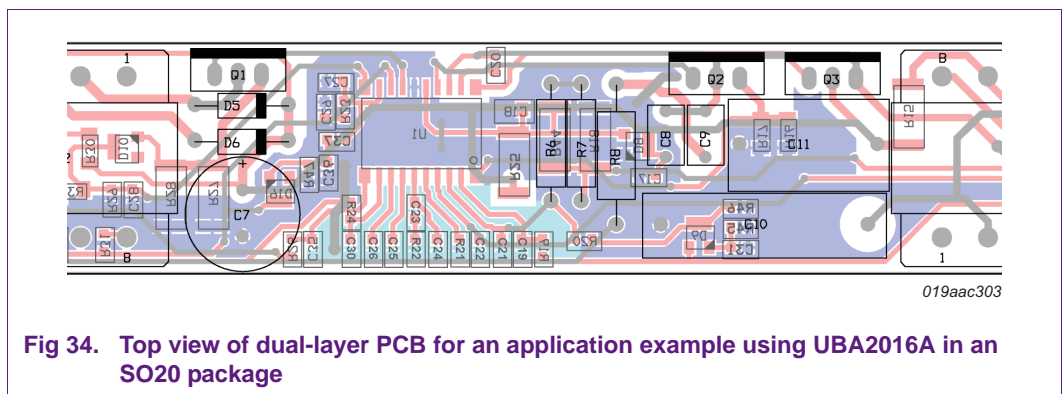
Top view of dual-layer PCB for an application example using UBA2016A in an SO20 package
